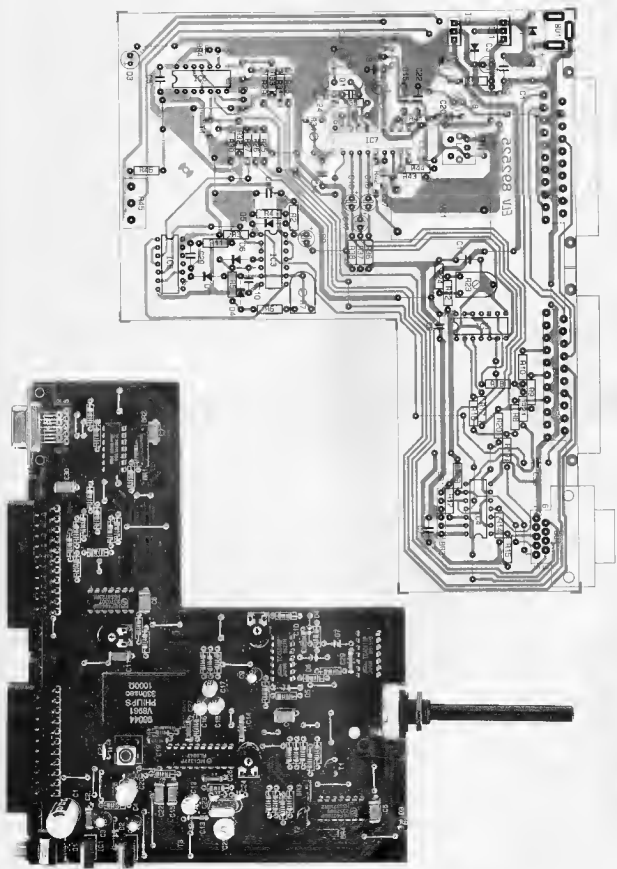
Component mounting plan and top view of the printed-circuit board for the RGB-to-CVBS converter.
